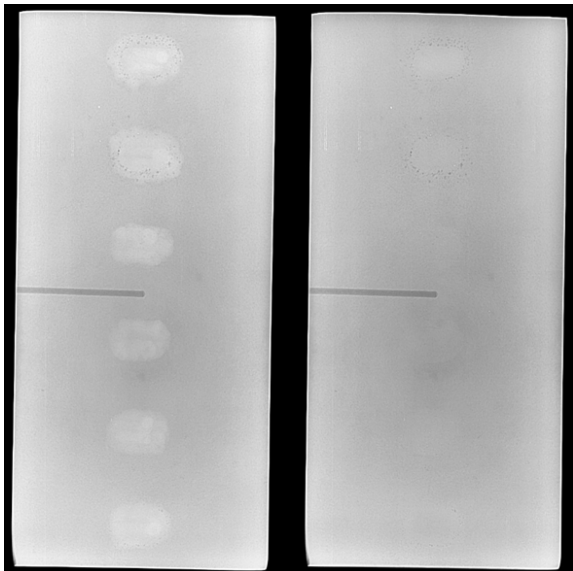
Left image, before stock removal, right image after 1 mm stock removed
